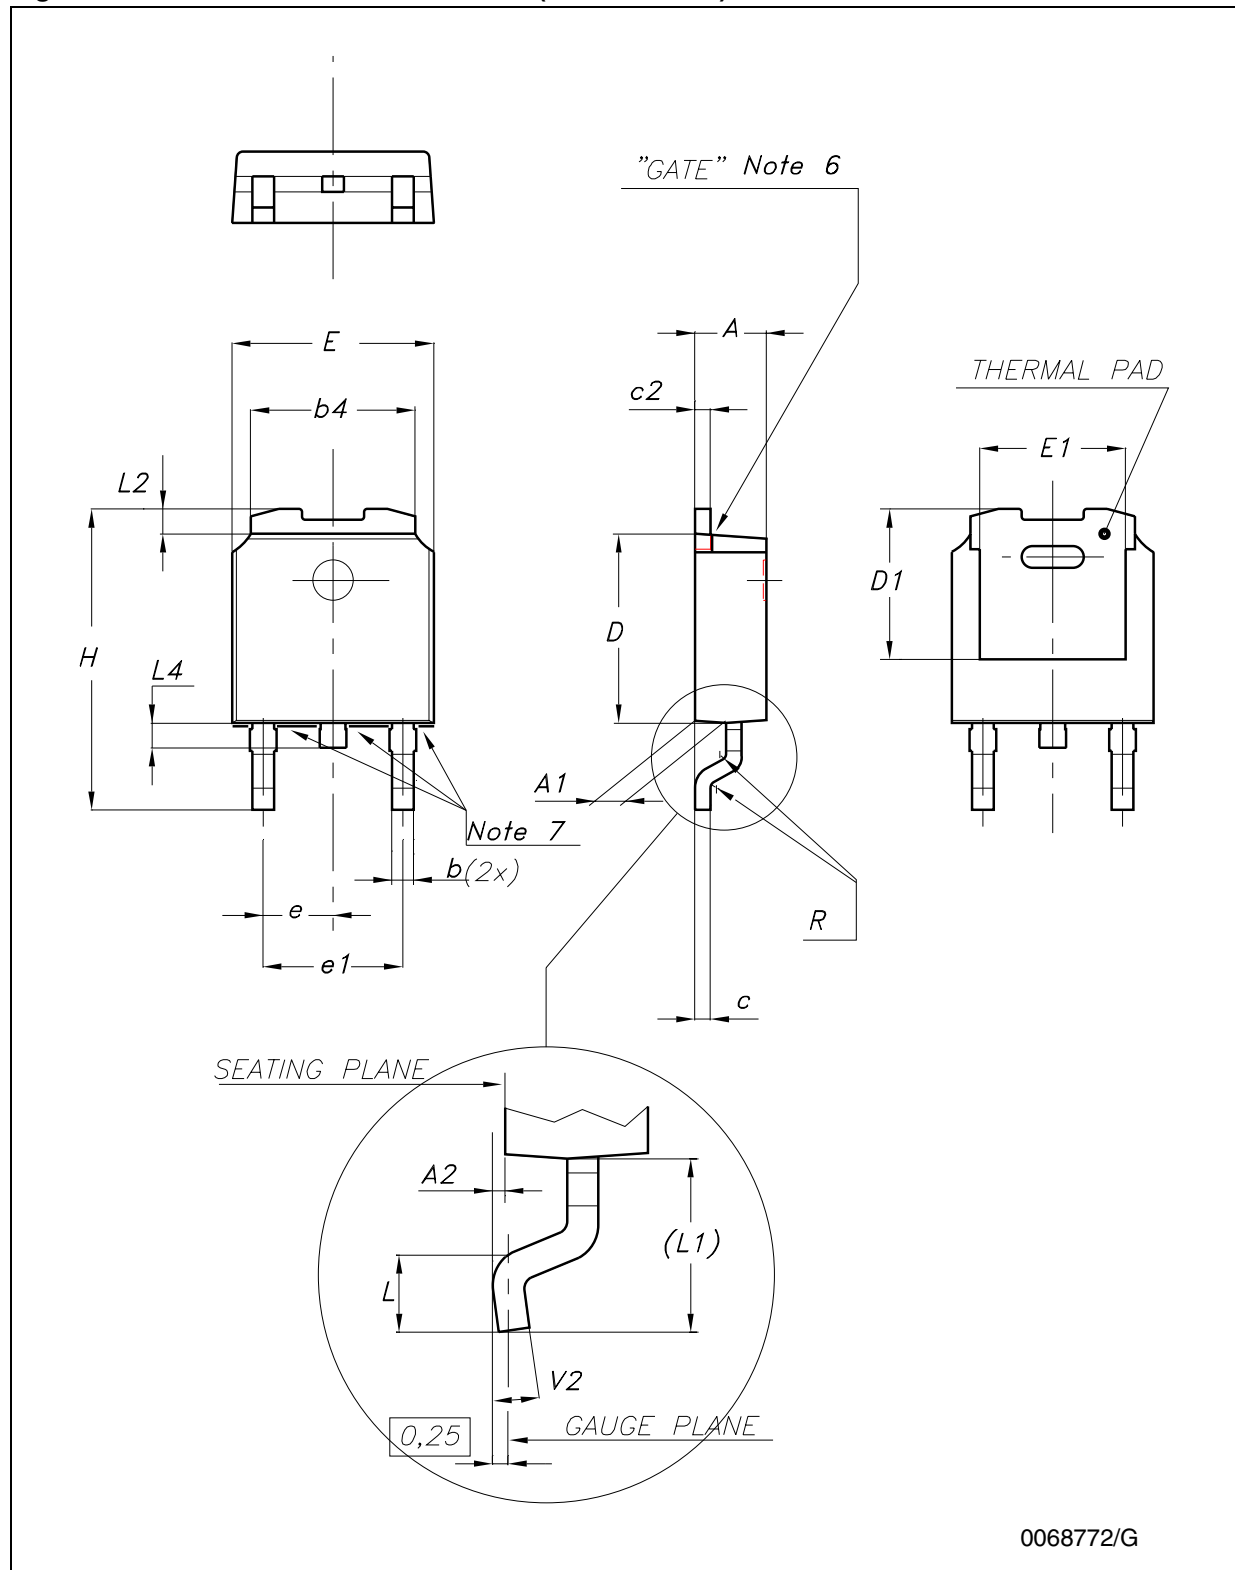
DRAWING DIMENSION DPAK (TYPE FUJITSU-SUBCON.)
